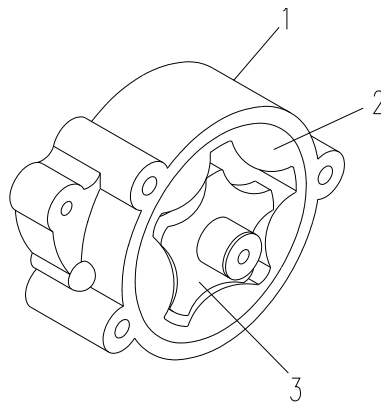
Oil Pump Assembly (Sheet 1 of 2)
